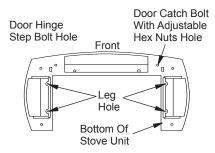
Locating Threaded Holes for Legs and Door Attachment
